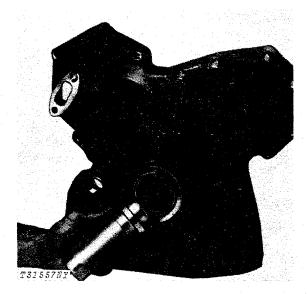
Installing Oil Seal in Timing Gear Cover Using JD-250 Driver
